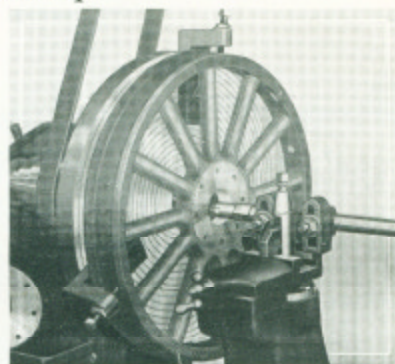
Boring a wood wheel for fitting the hub. The wheel is mounted on an extra large face plate. The hub can be fitted to the hole without removing the wheel from lathe.
